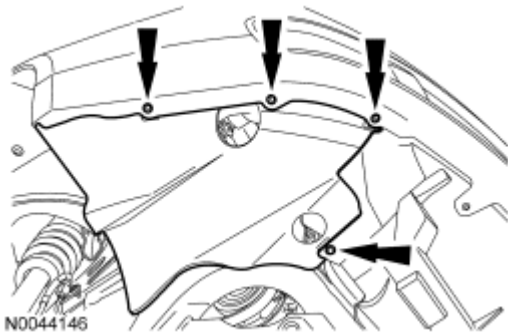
Locating Screws And Position LH And RH Splash Shields Aside
